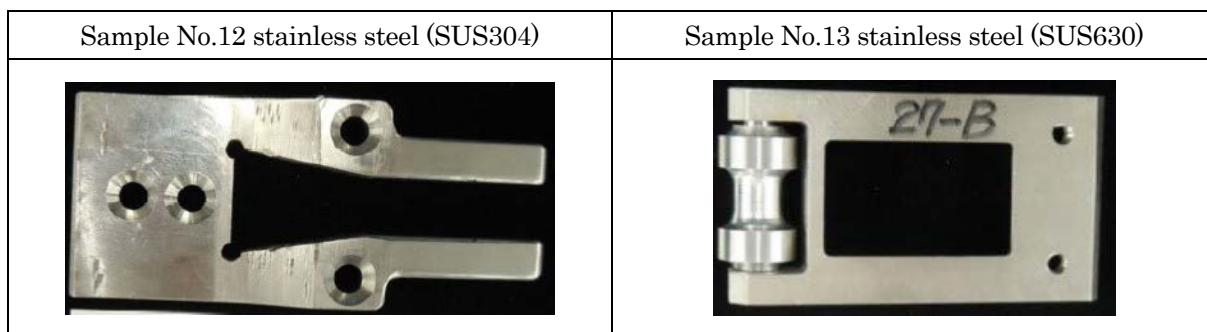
External appearance of the stainless steel (Samples No.12-13)
